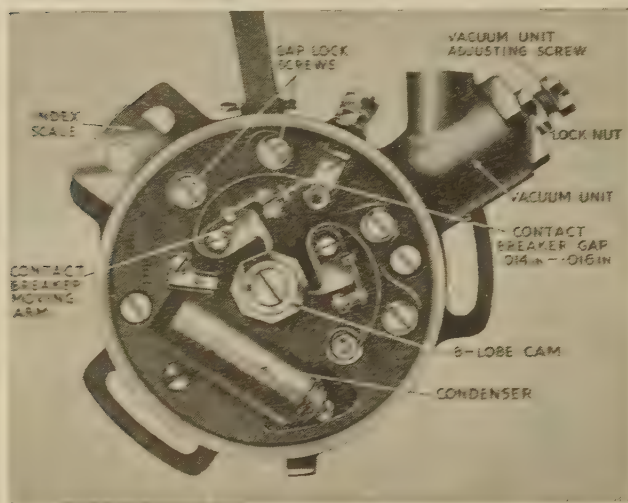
The Ford V-8 Contact-breaker Unit.
